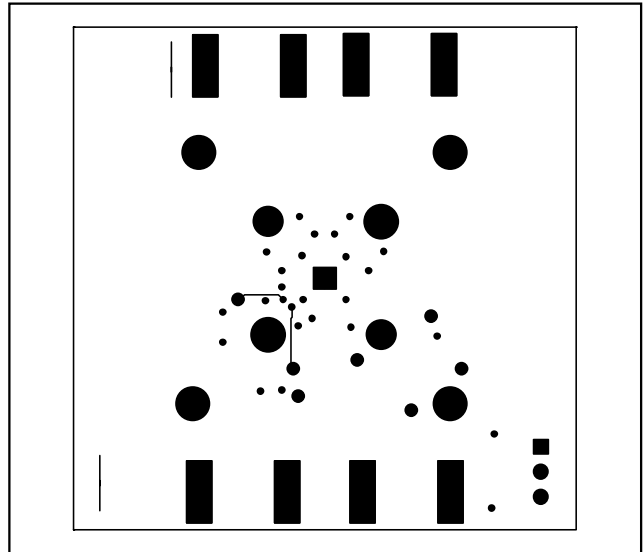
MAX3801 EV Kit PC Board Layout—Solder Side
